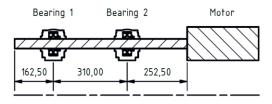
Cross-section view of gearbox. In bearing node, bearing 1 is floating and bearing 2 is fixed.
